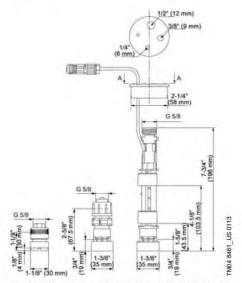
Left: stainless-steel foot valve; center and right: PE or PVDF foot valve, dimensions
